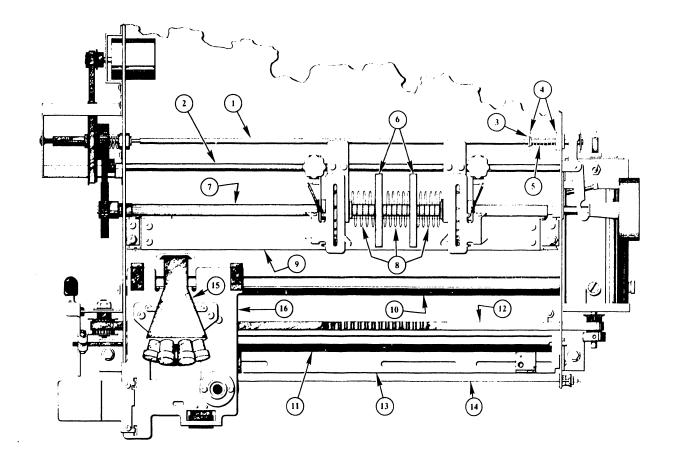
SHAFT ASSEMBLY LOCATIONS
